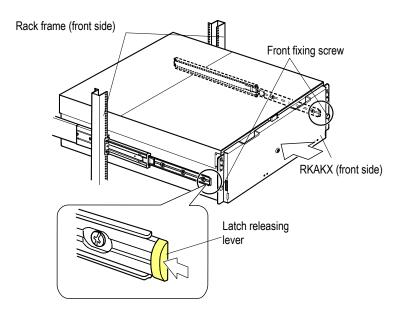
Mounting the RKAKX to Rev.C or later Rack Rails
